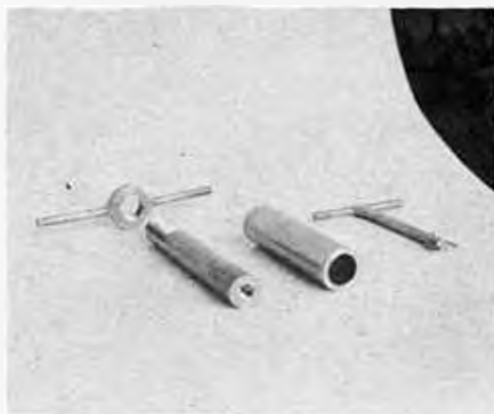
Three components of the retracting tool. Spanner wrench on right.
